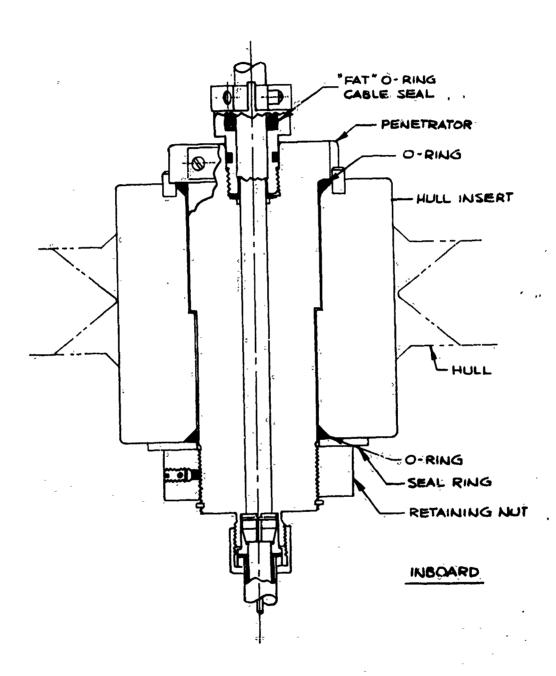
Through Cable Penetrator with O-Ring Cable Seal
